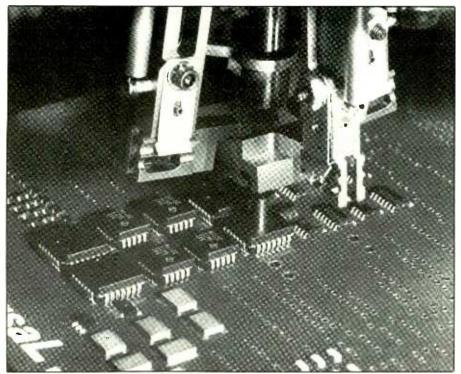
Surface-mount components being positioned by an automated pick-andplace machine. (Courtesy Universal Instruments, Inc.)
